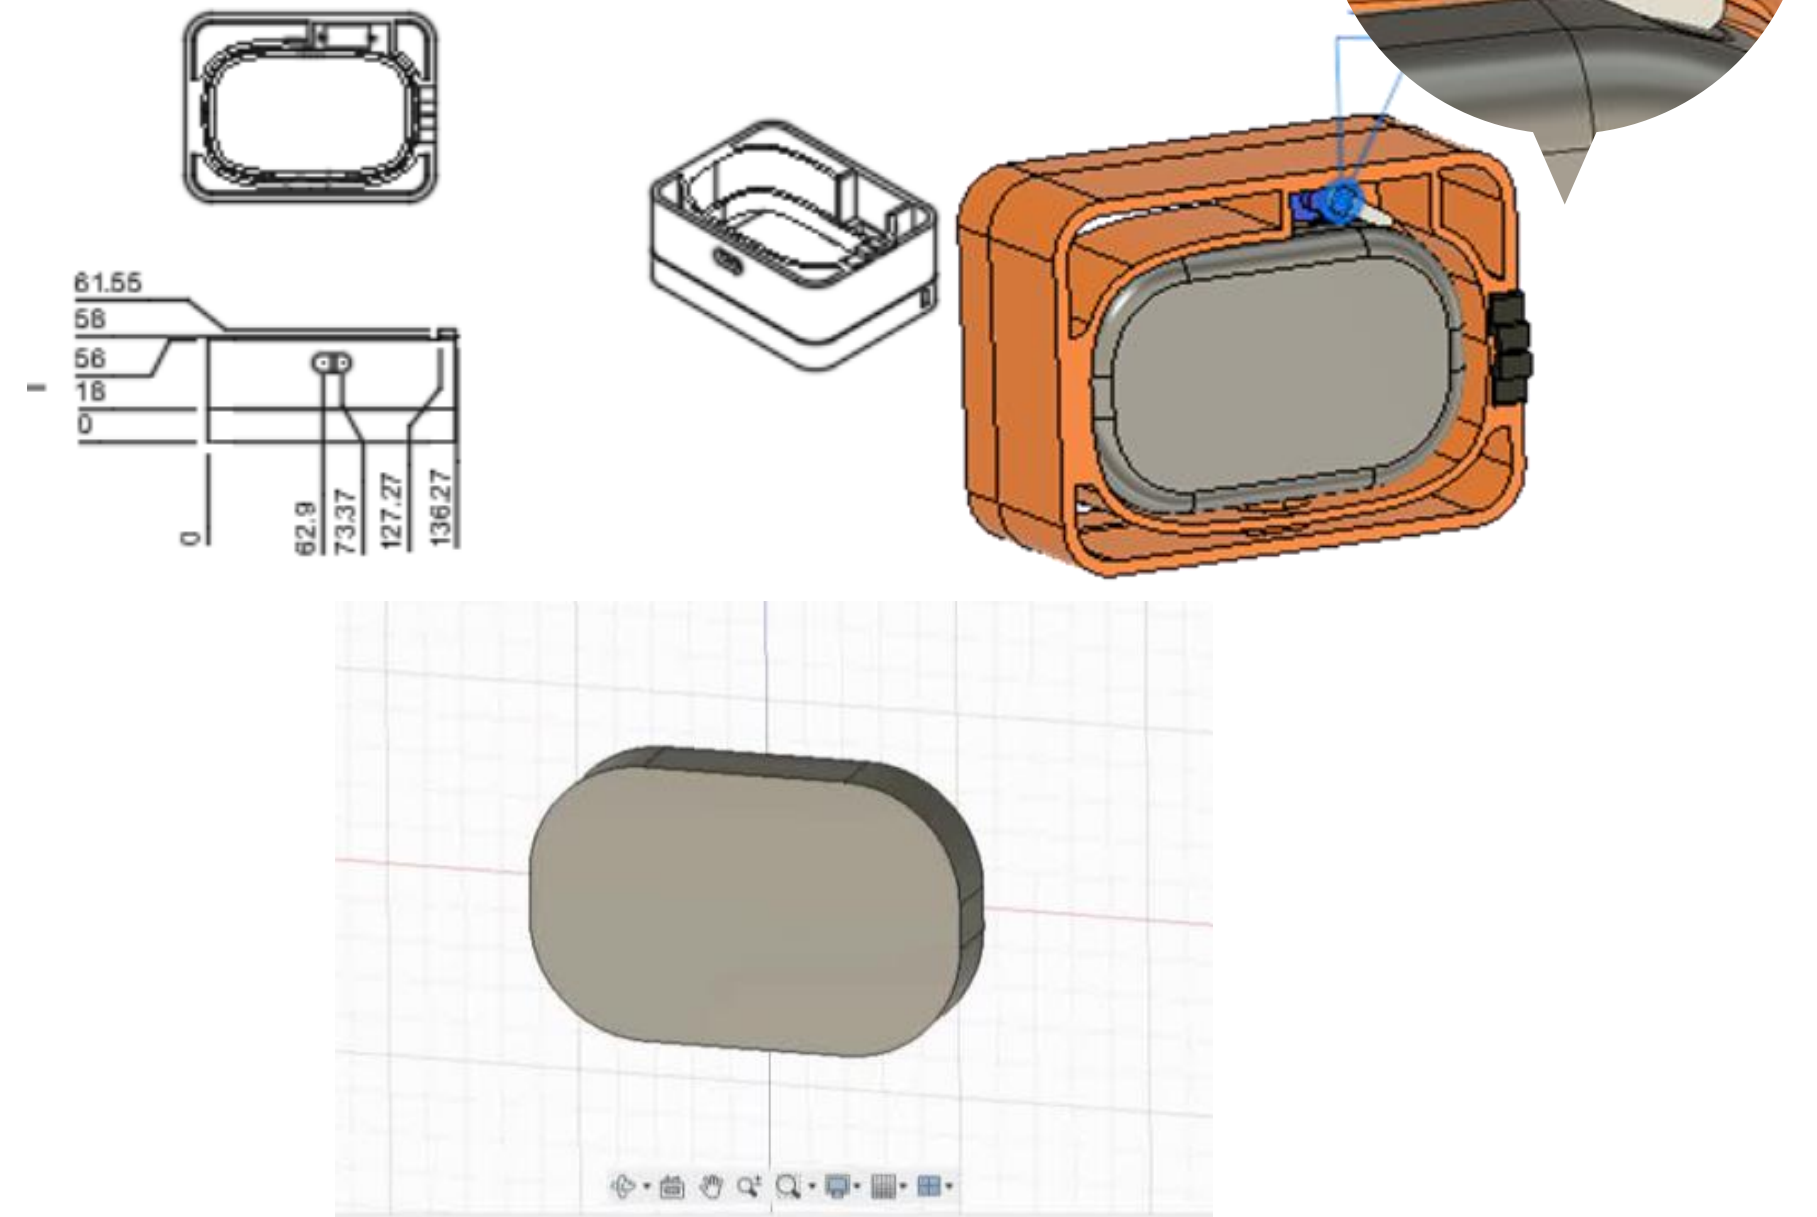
Top, bottom, and right side view of casing (upper left). Angle in which the mechanism travels (upper right). Timelapse of the CAD (bottom).
